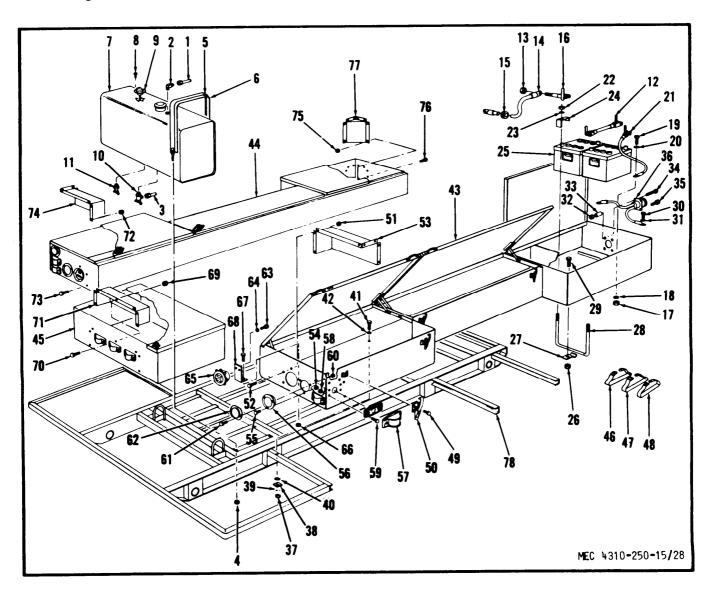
Tool Boxes and Fuel Tank, Removal and Installation.
